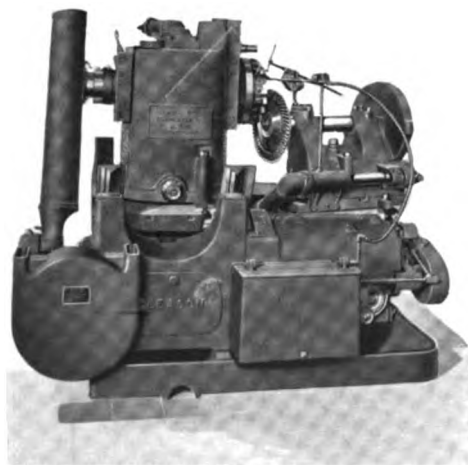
Gleason Spiral Bevel Gear Generator Standard Machine for Cutting Spiral Gears.
